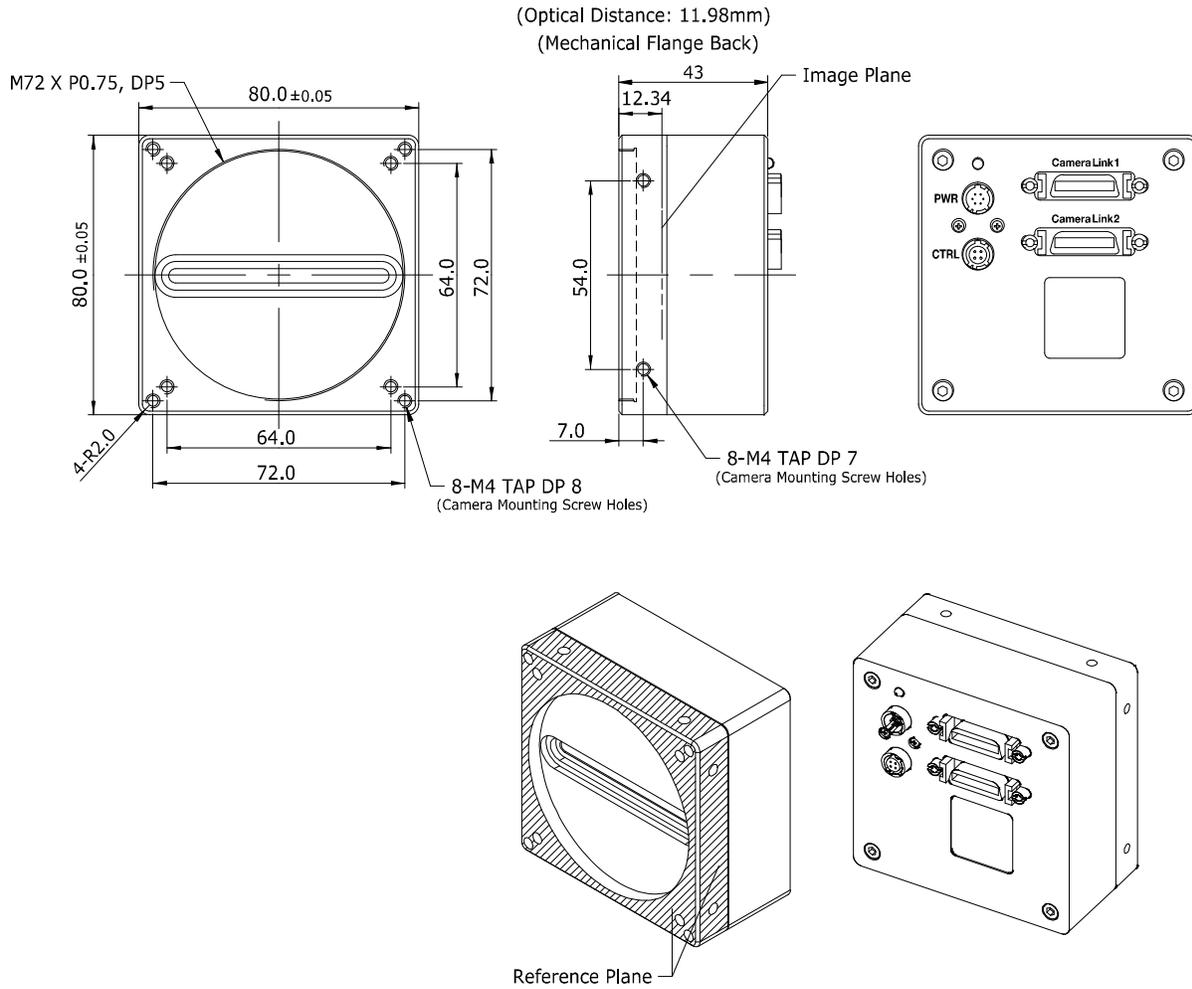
VL-8K7C-C80F-2 Mechanical Dimension
